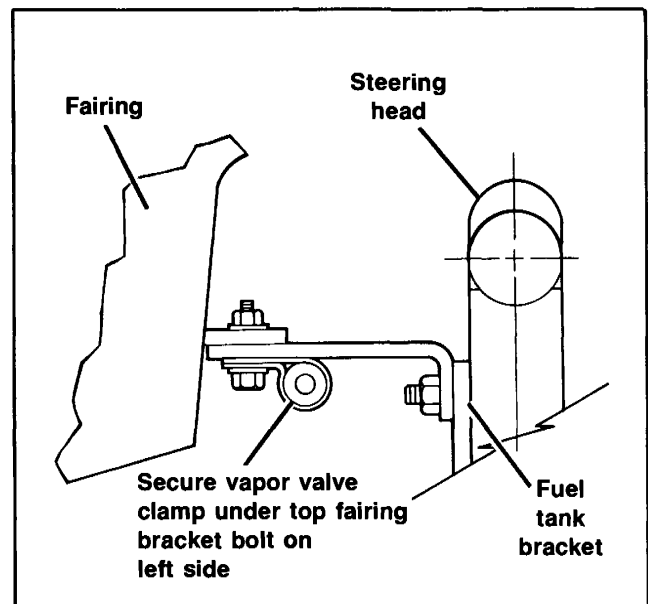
FXRT Vapor Valve Mounting (Top View)
